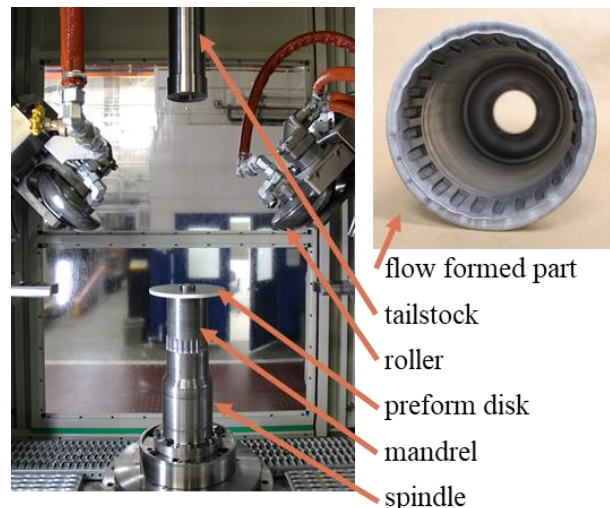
The interior of the VUD-600 forming machine, with major components and a demonstration part highlighted.
